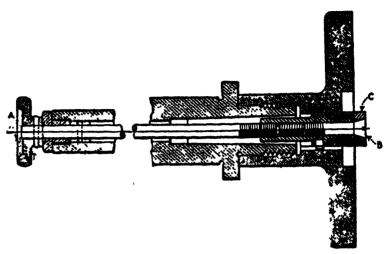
DETAILS OF DEVICE FOR HOLDING WORK FOR FACE GRINDING
